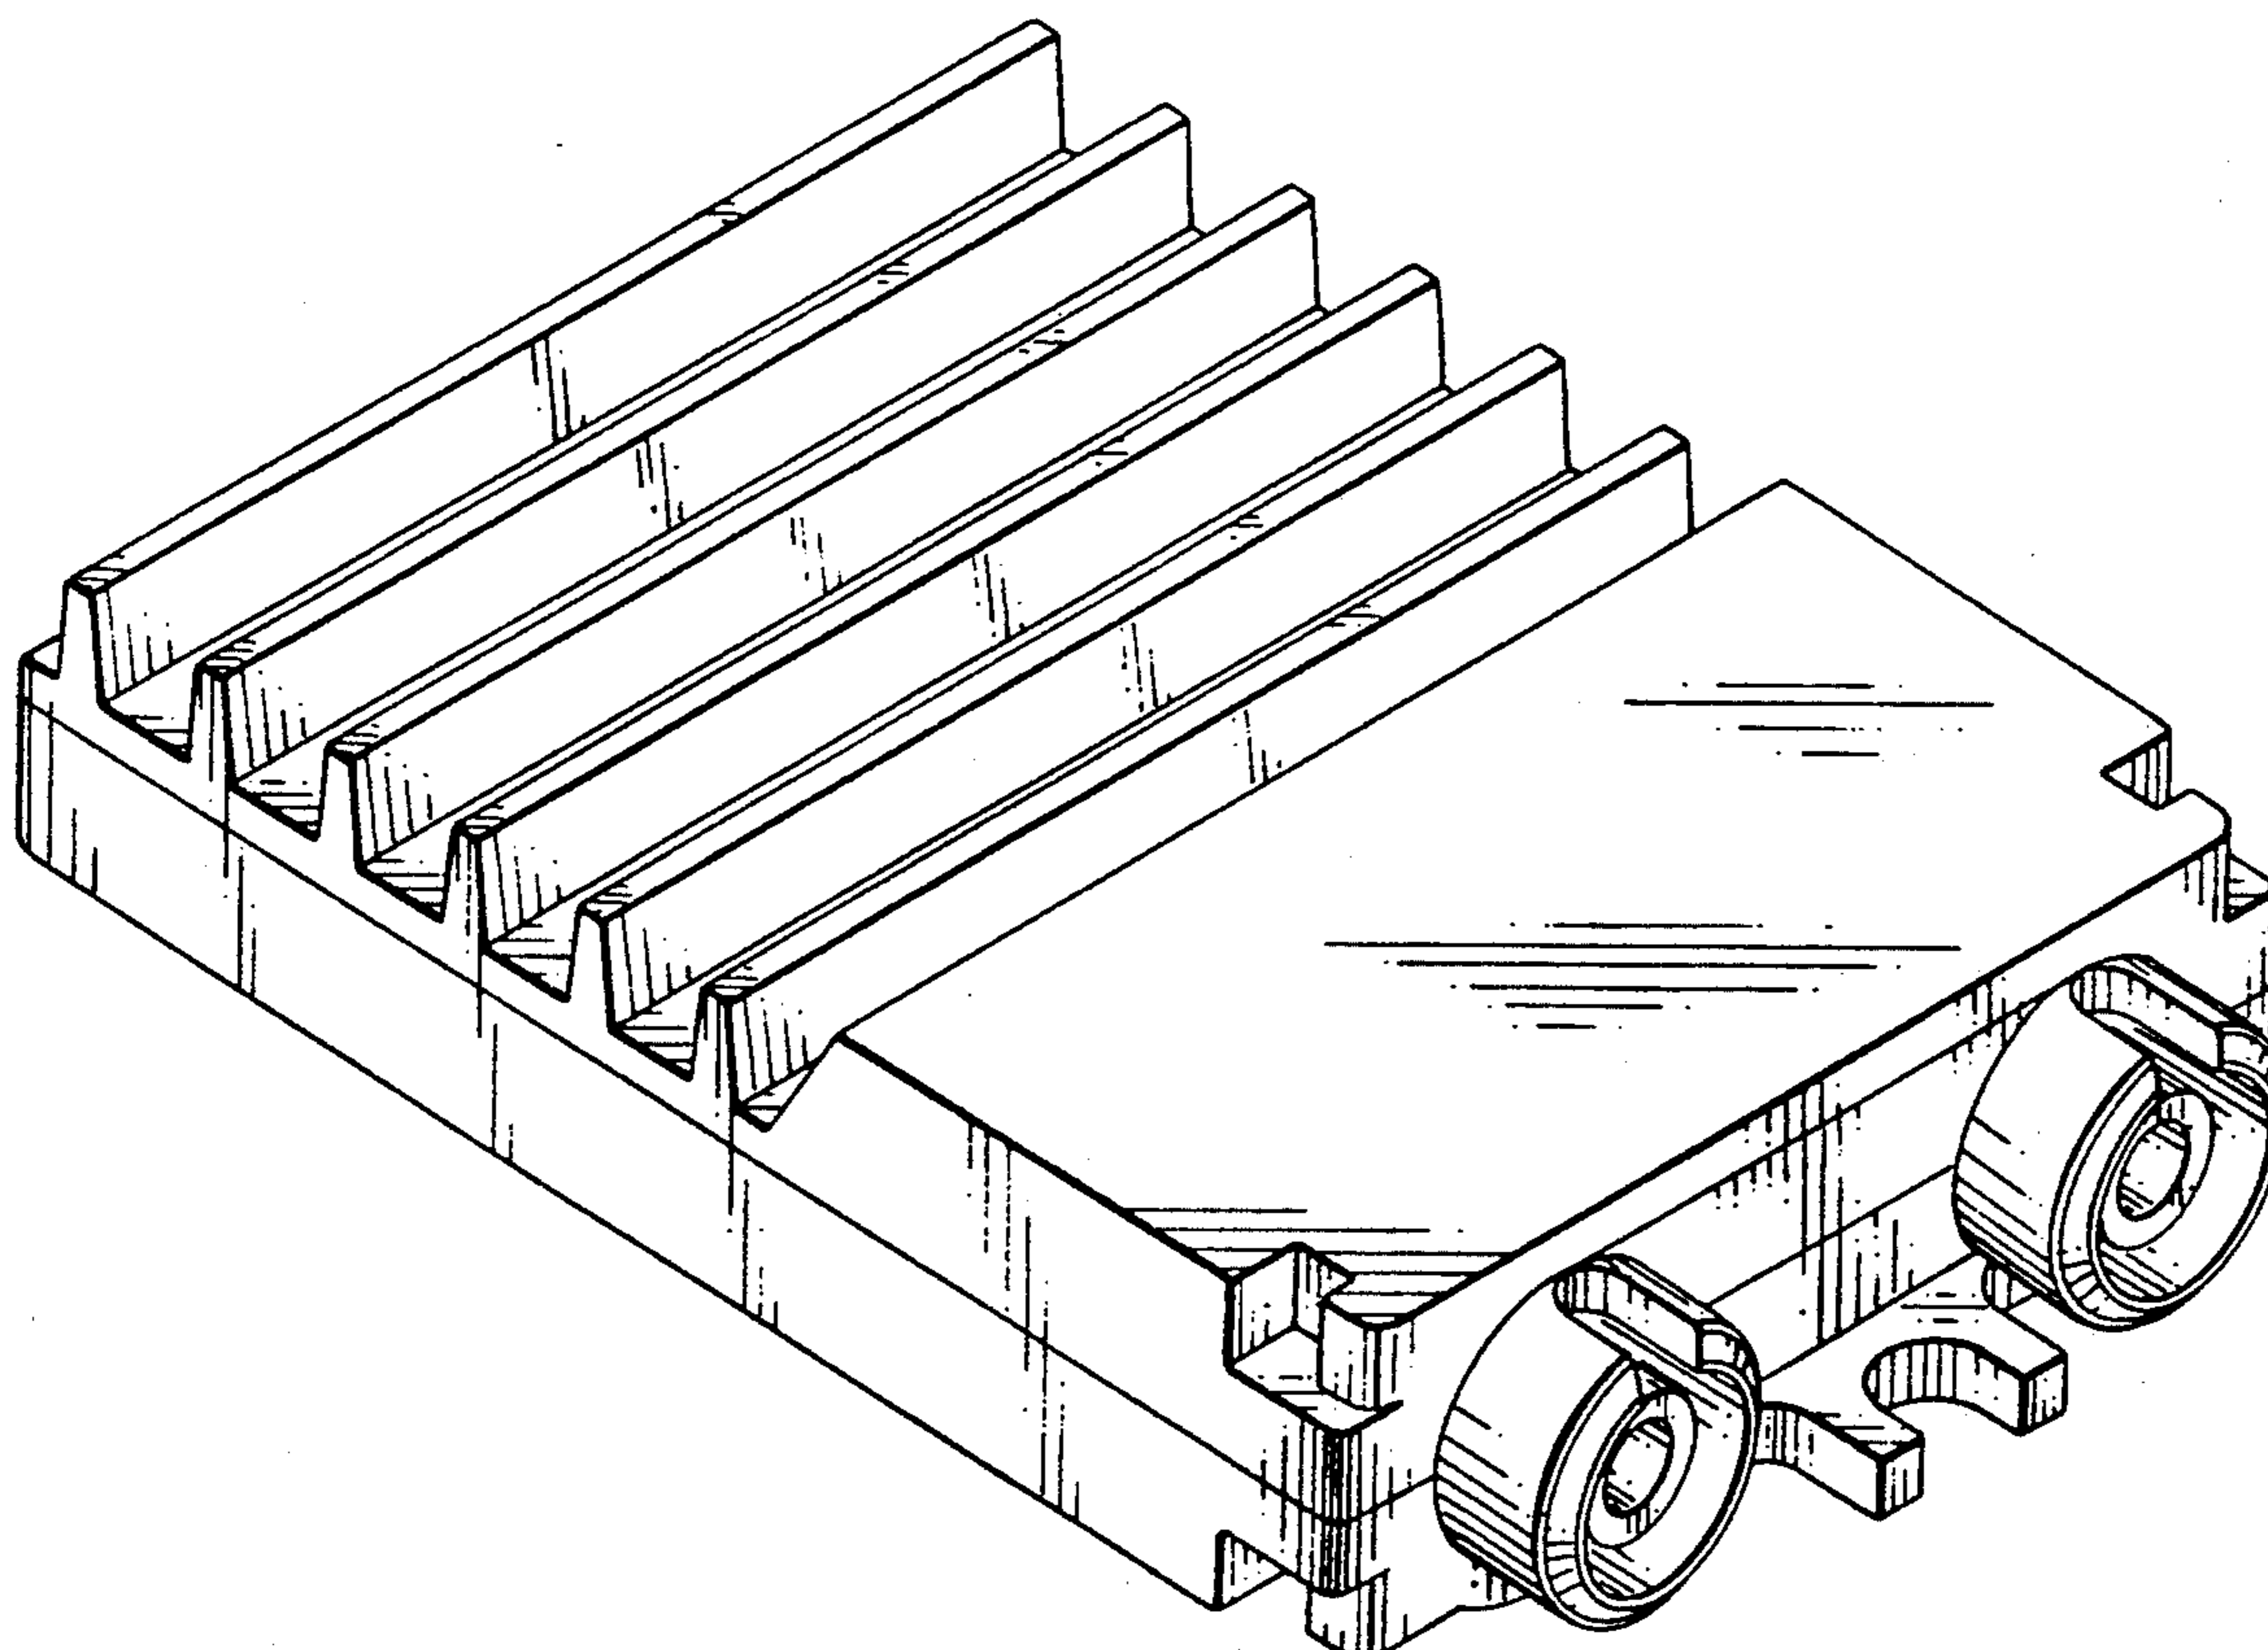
is a perspective view of an optoelectronic assembly, illustrating our new design;
